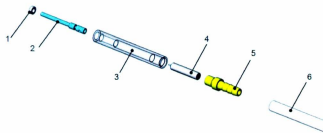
Exploded View of Wingtip Actuator Assembly
